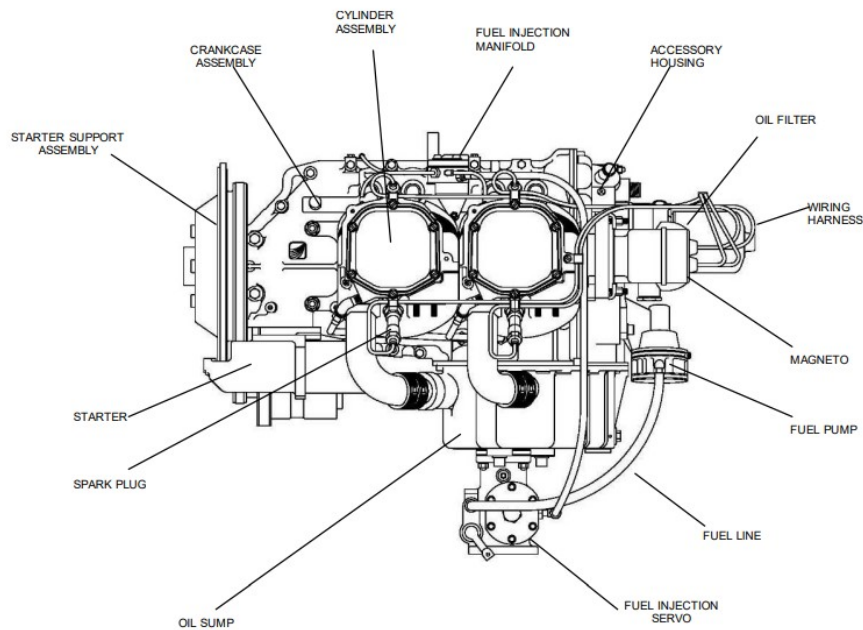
Left side view of a IO-360 Lycoming engine [65]
